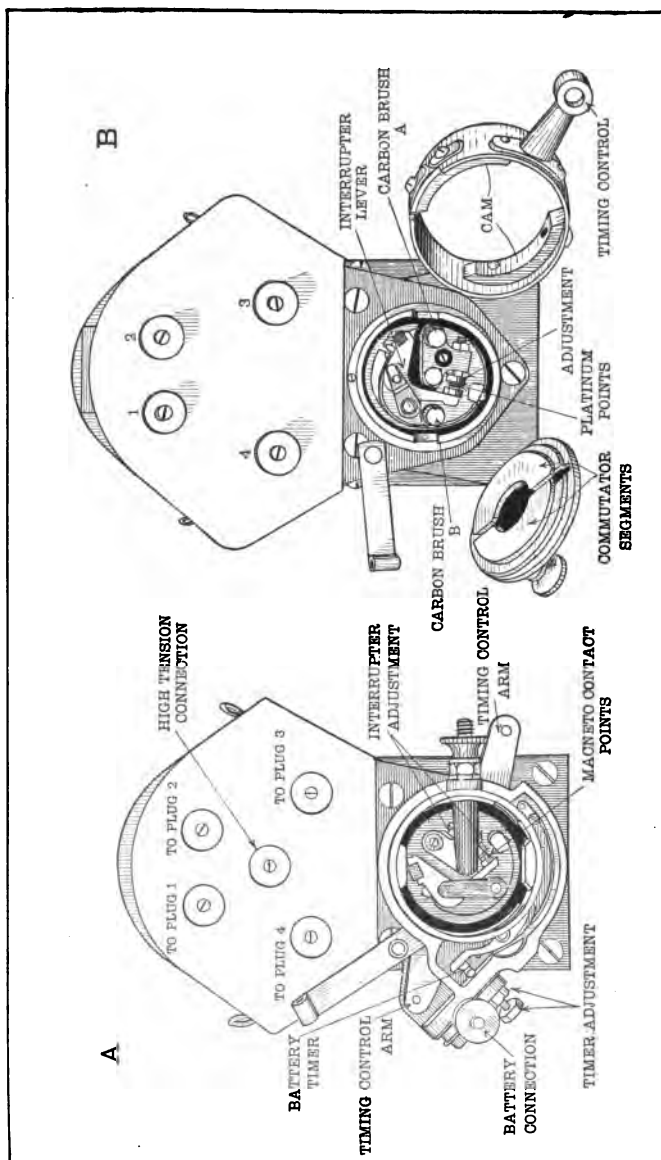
Contact Breakers for Bosch Magneto Double Ignition Systems. A—Arrangement for Dual Ignition.
